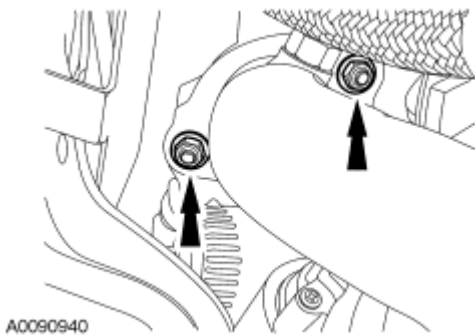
Locating Dual Converter Y-Pipe Nuts
